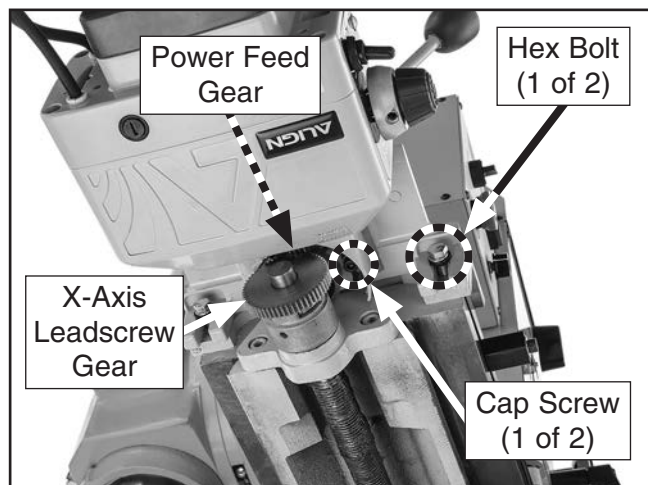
Left side of power feed bracket with attached power feed unit mounted to right side of bracket.
